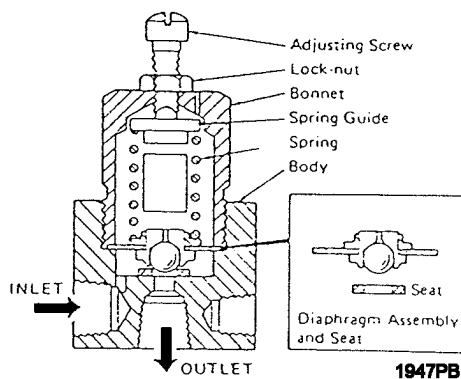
CONTROL PRESSURE REGULATOR VALVE
